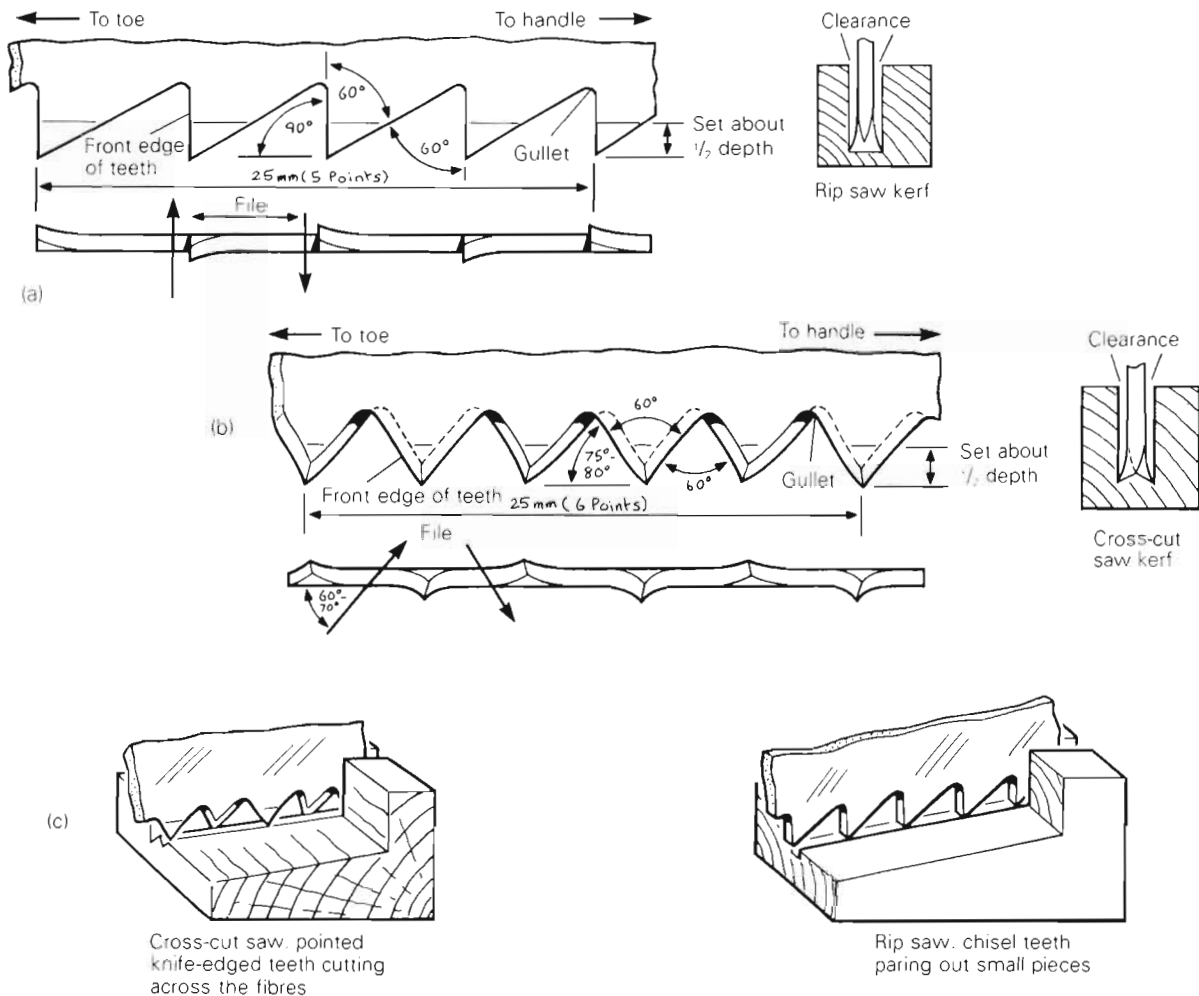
Shape of saw teeth: (a) rip saw, (b) cross-cut saw, (c) cutting actions.
